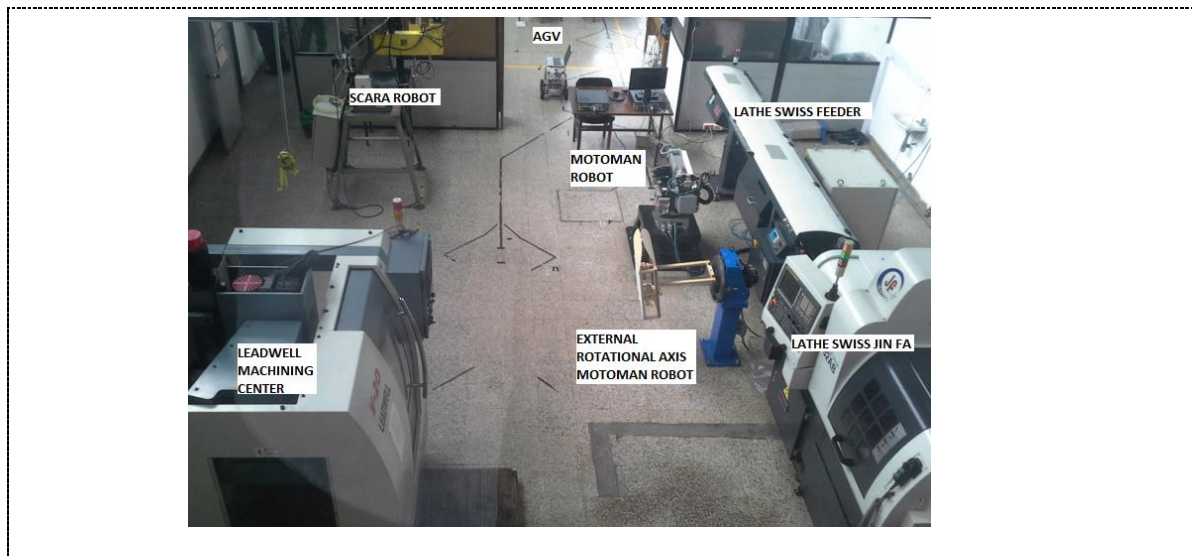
Industrial Manufacturing Cell's Machines and their physical disposition. Universidad Nacional de Colombia. Mechanics and Mechatronics Department. Cam-Mechatronics room Lab
